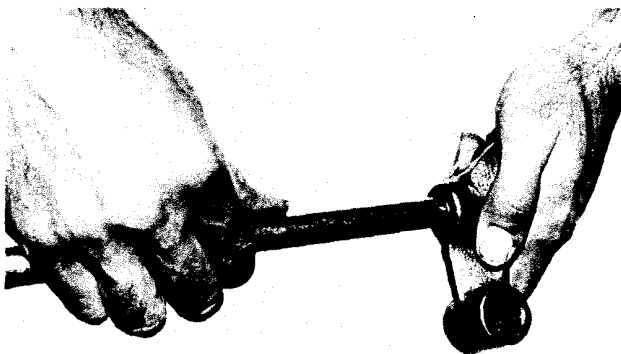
, (N10413). Checking cam follower insert with push tube
